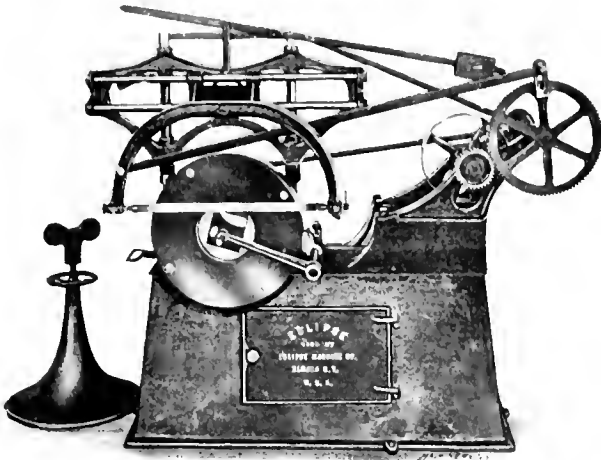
The Eclipse Machine Co.'s Power Hack-saw.
